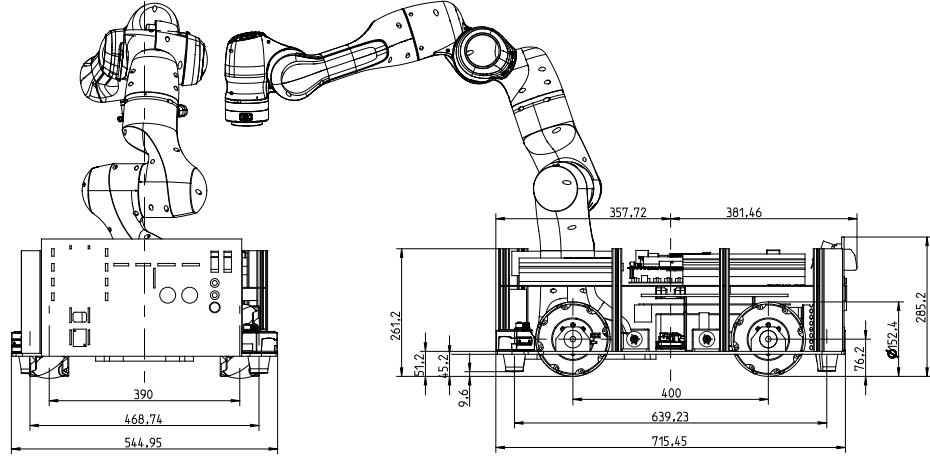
Dimensions of the mobile manipulator LeoBot.
